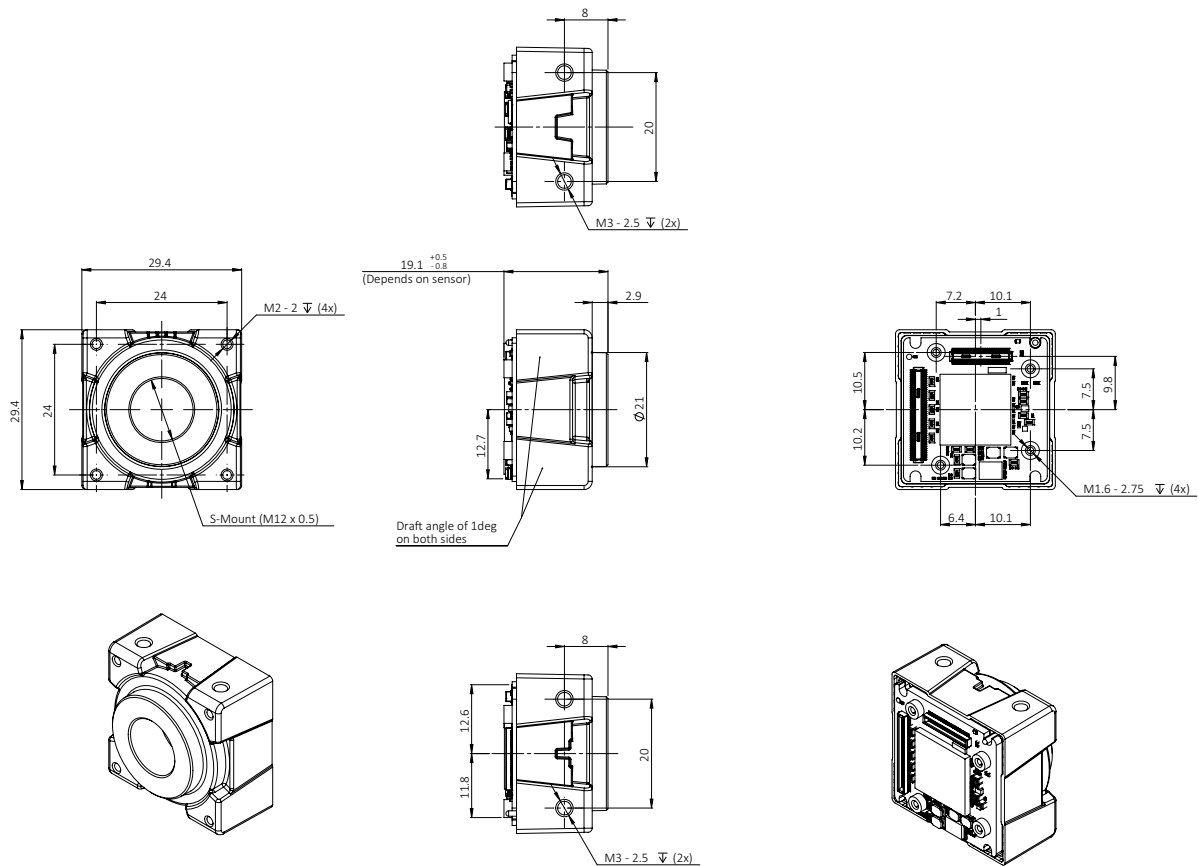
Open Housing S-Mount (Alvium Flex) dimensions
